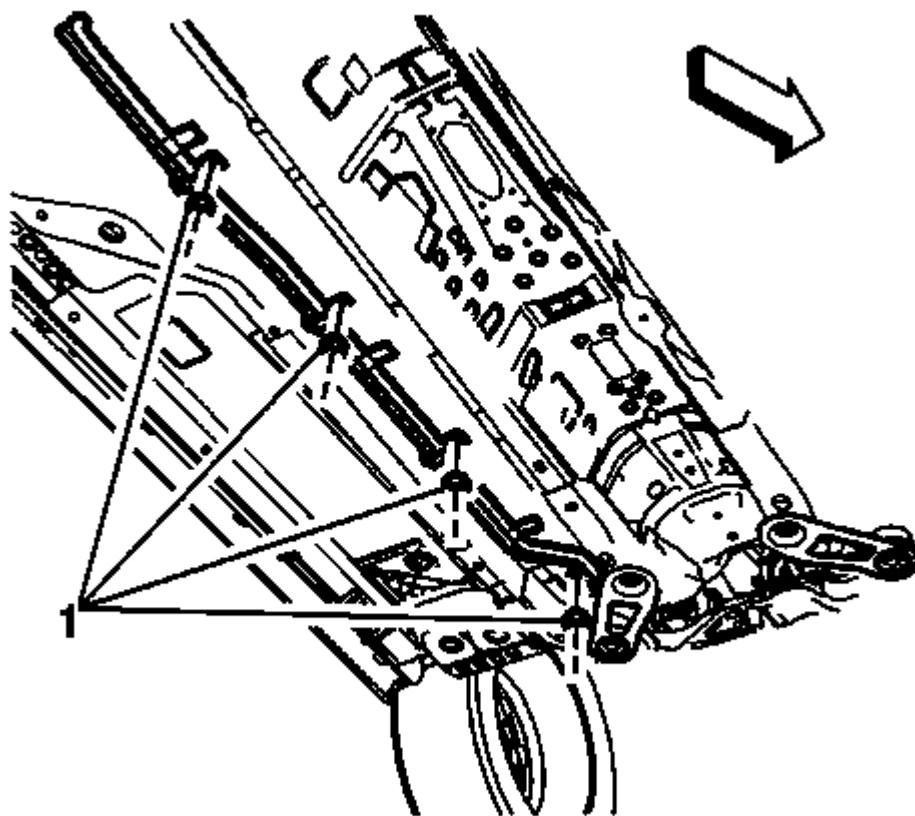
Drive Motor Generator Battery Fastener Bolts
